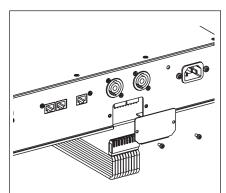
Remove the flat cable cover plate and detach the flat cable connector. Replace the cover plate.
